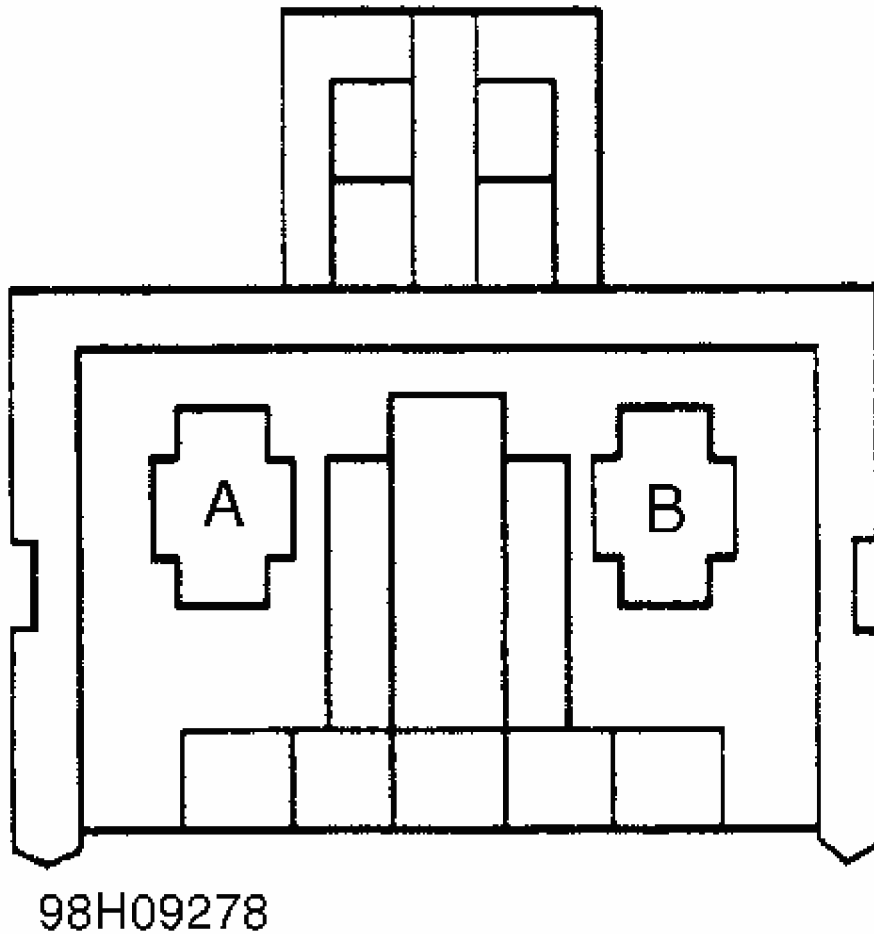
Identifying Side Impact Air Bag Module Connector Terminals
